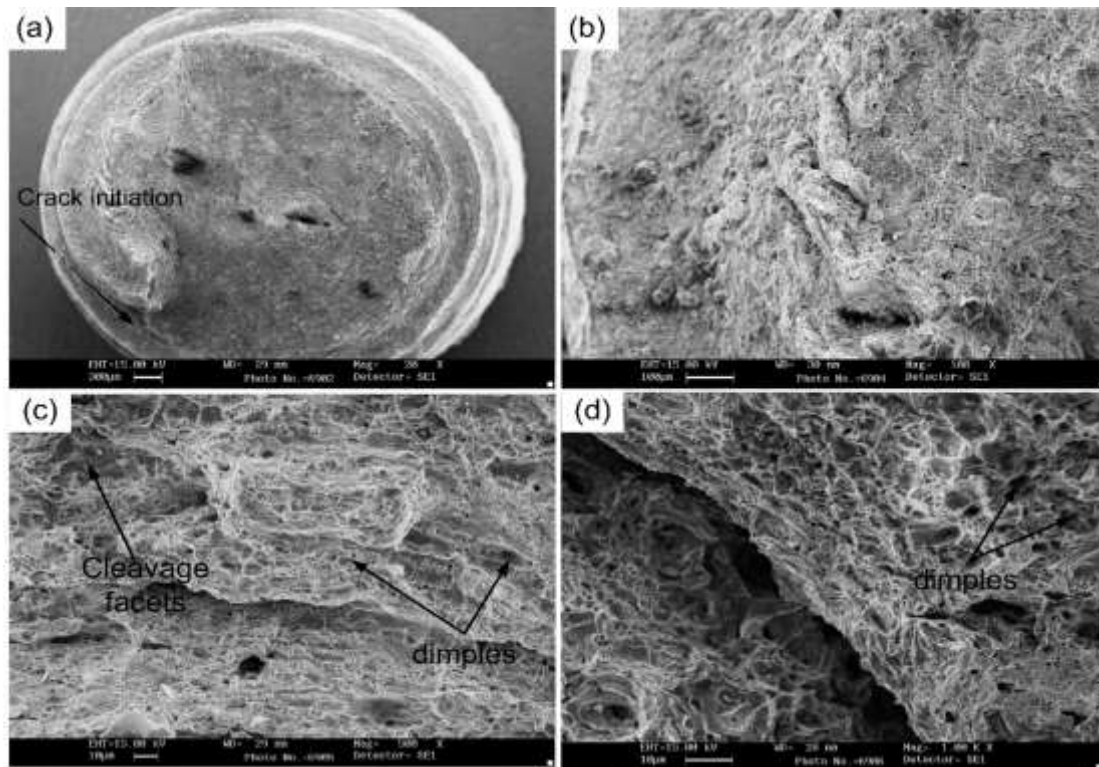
Fracture morphology of AISI 8620 implant specimen; (a) Top-view of fracture surface, crack initiation zone (b) cleavage and dimples (c) final fracture zone (mixed mode), (d) microvoid coalescence
